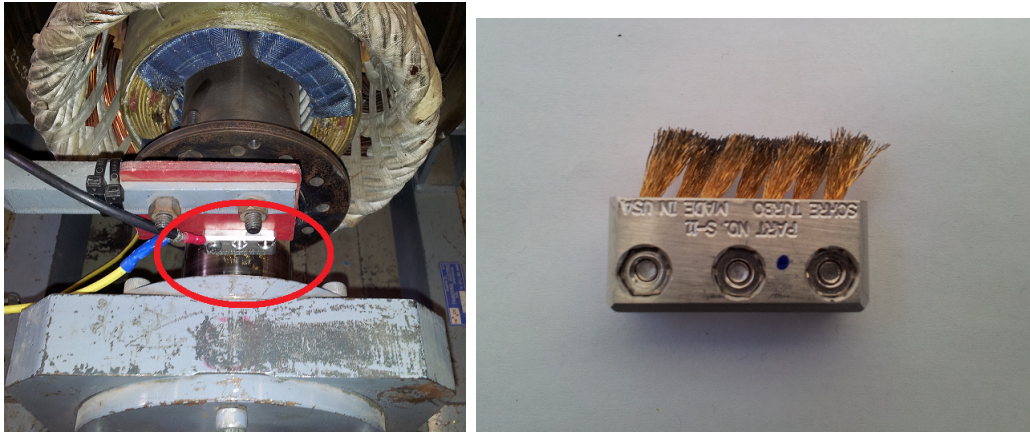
Photograph of shaft brush arm riding on rotor shaft (left) and brush insert (right) used for measuring shaft voltages
